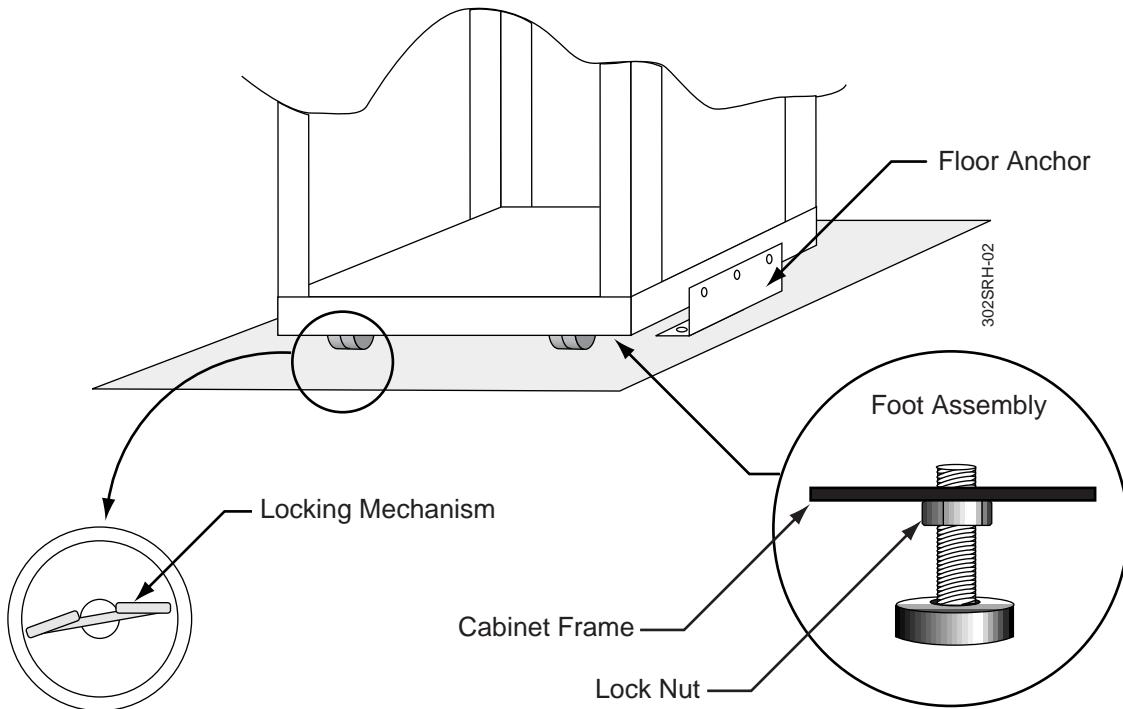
Wheel Caster Lock and Sample of Floor Anchors
